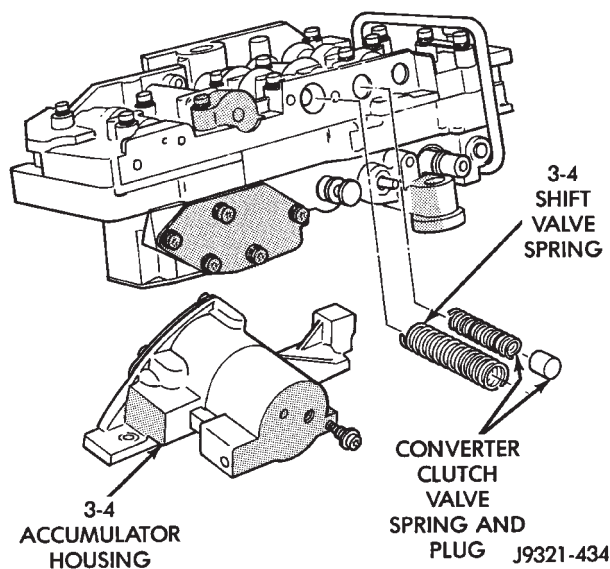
3-4 Accumulator Housing, Valve Springs And Plug Removal
